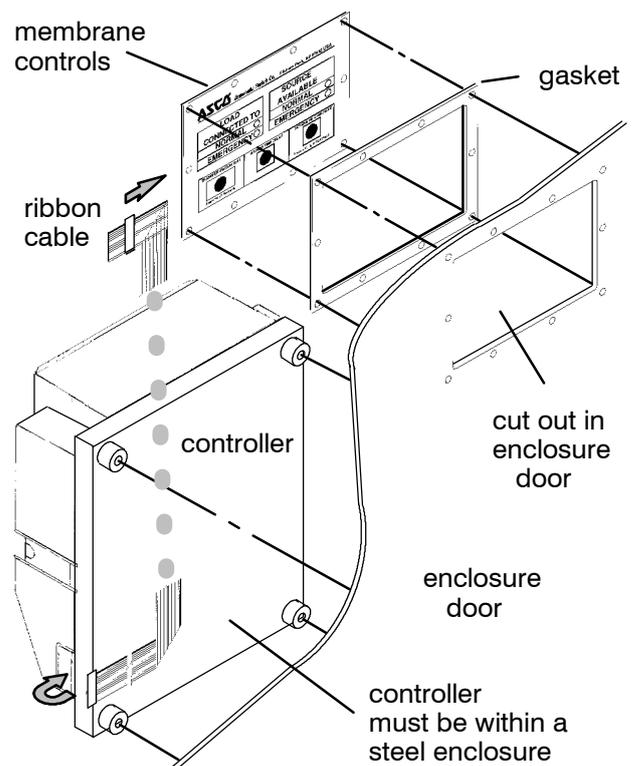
Membrane controls and controller mounting on inside of enclosure door. Refer to *Outline & Mounting Diagram* for mounting hardware.
